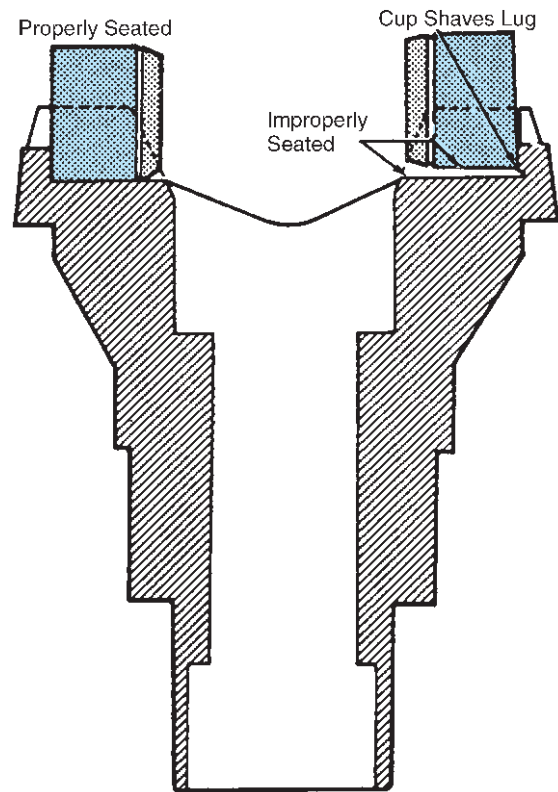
When replacing a driveshaft, make sure that the bearing cups are properly seated inside the lugs of the flange. (Courtesy of Ford Motor Company)
